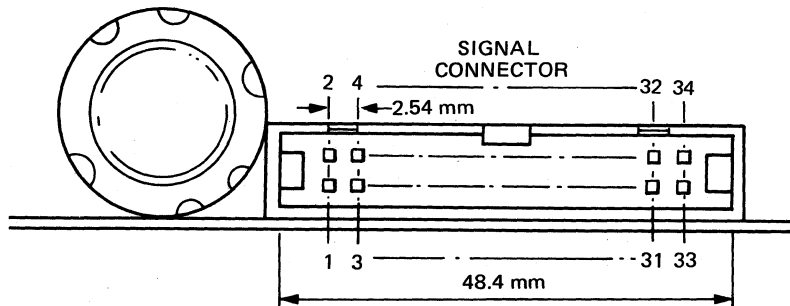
PIN ASSIGNMENT (REAR VIEW OF DRIVE)
